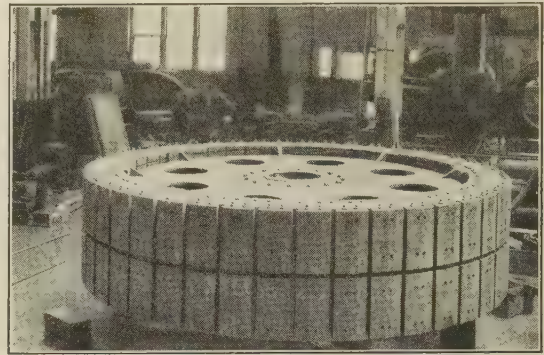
WELDED ROTOR SPIDER FOR 19,700-KV-A., REV. PER MIN. GENERATOR
